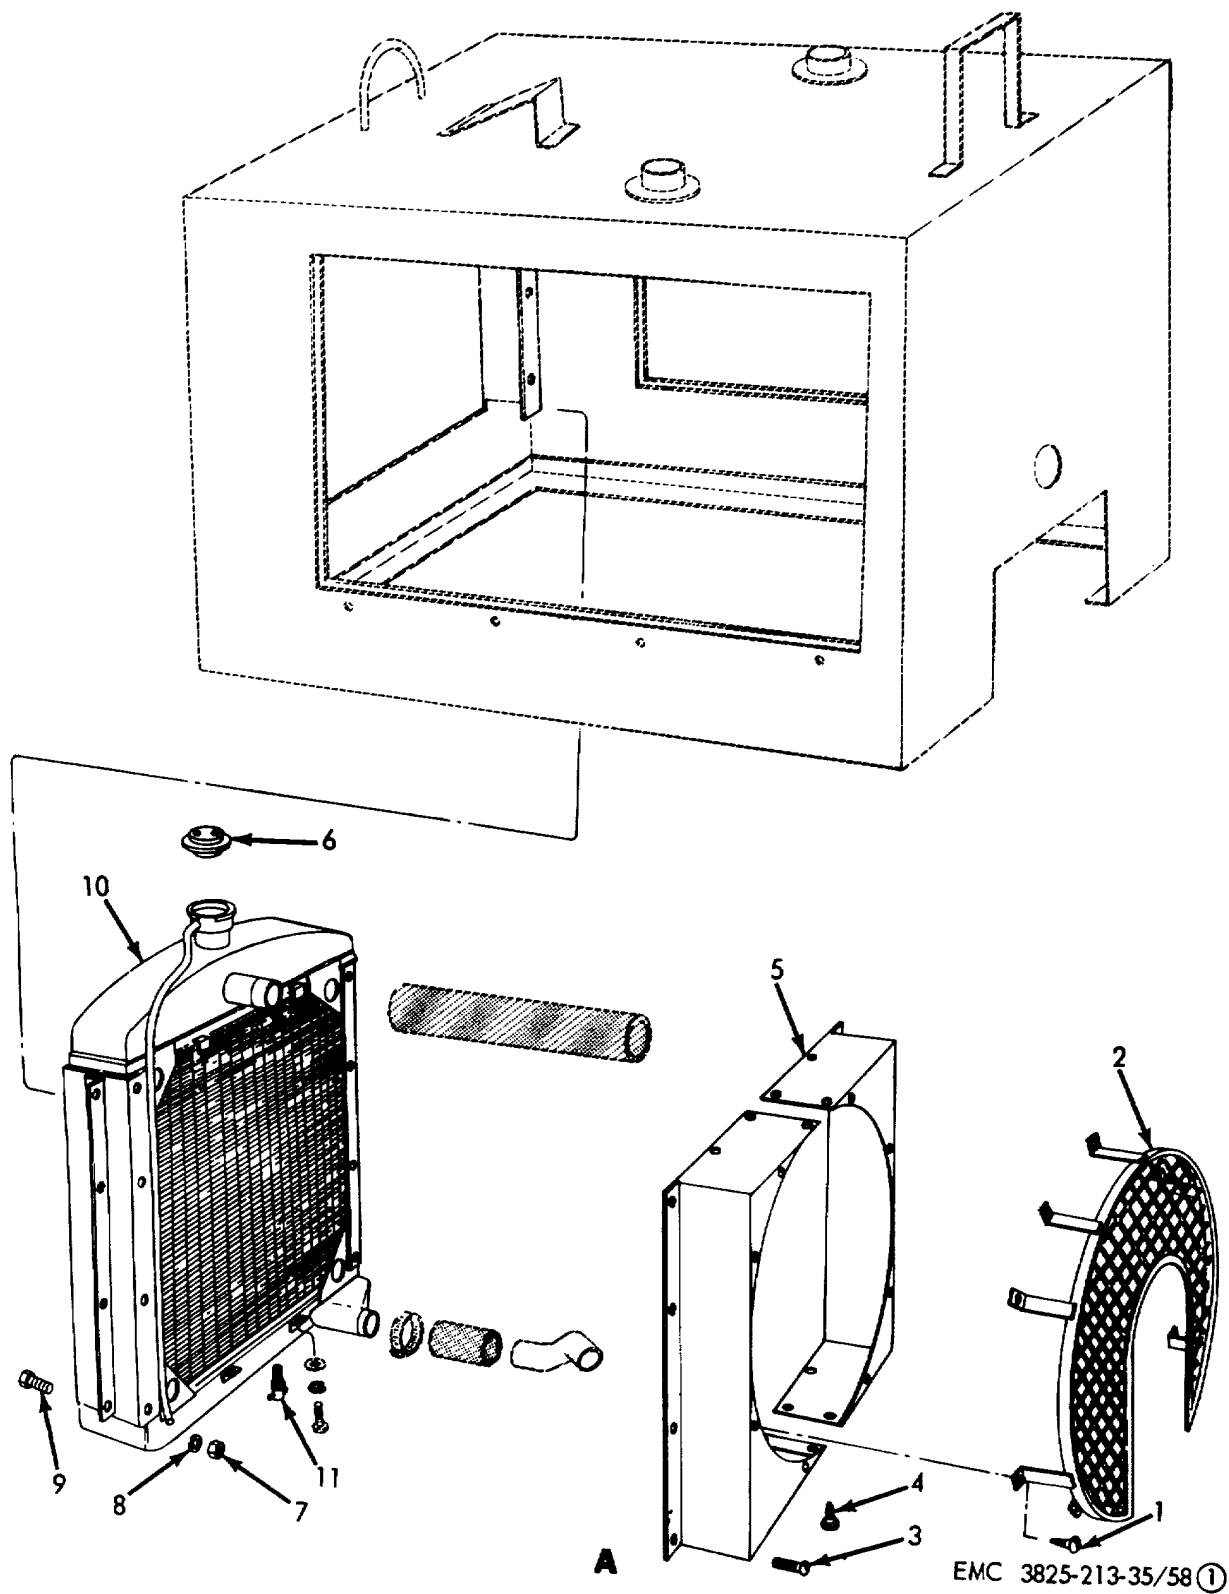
Carrier and plow engine radiators, disassembly and reassembly, exploded view.
